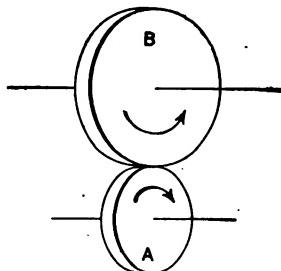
In gearing the speed is controlled by the proper choice of gears
